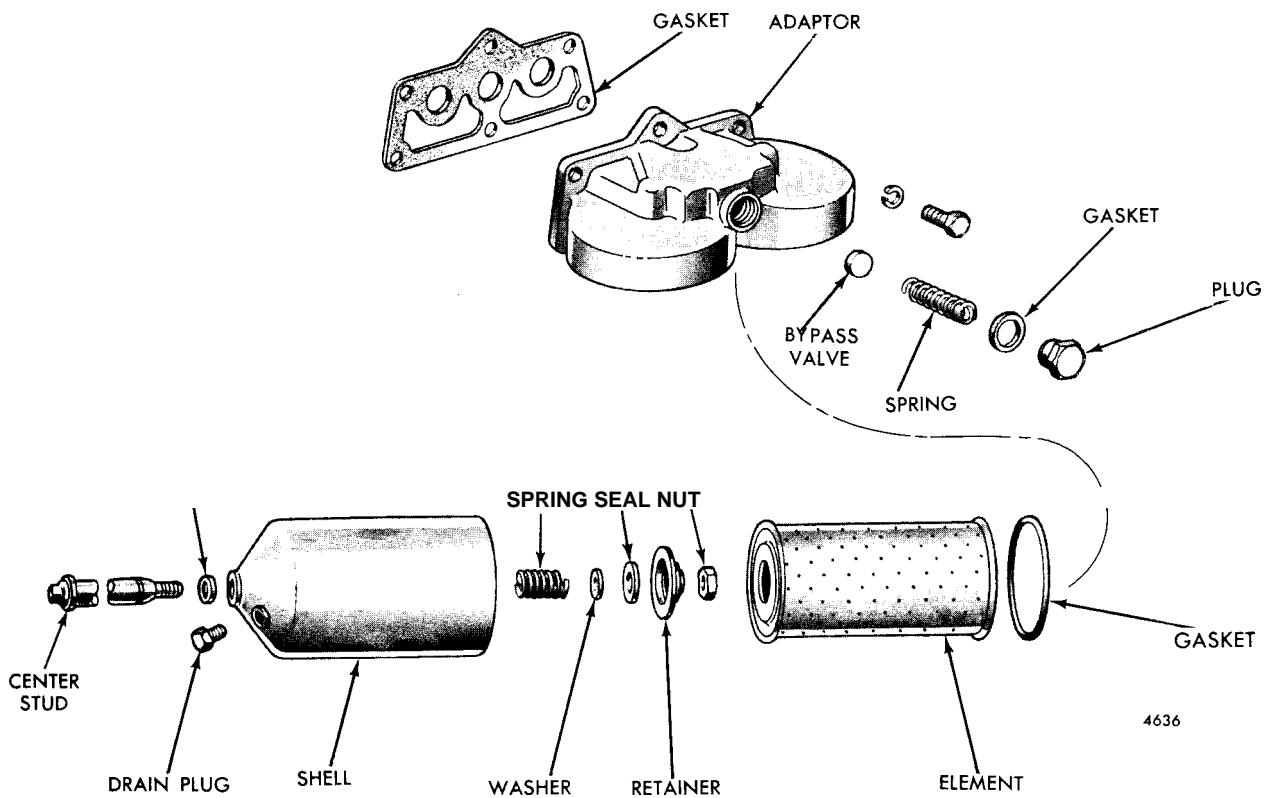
Oil Filter Details and Relative Location of Parts (Canister)
